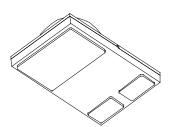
Mechanical dimensions for LUXEON Rebel Color Line.
